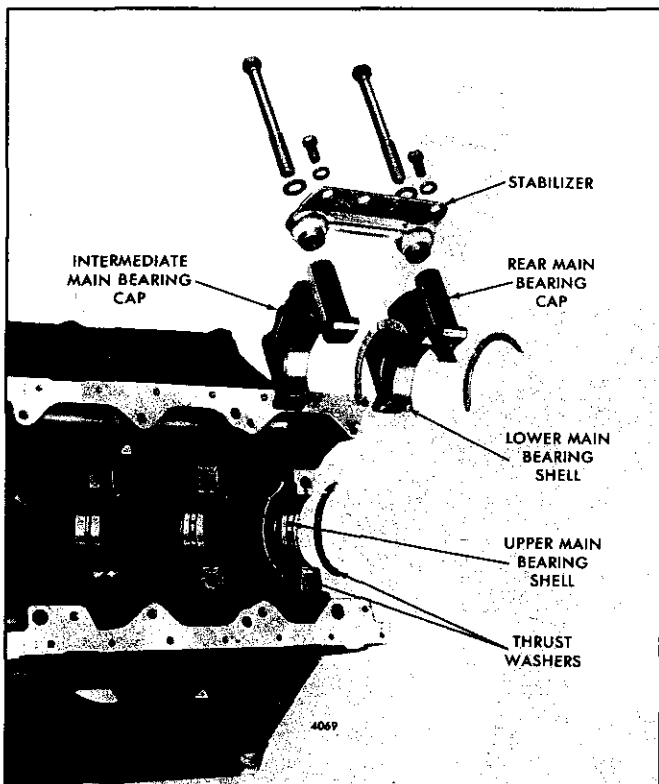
Main Bearing Shells, Bearing Caps and Crankshaft Thrust Washers — V-Type Engines
